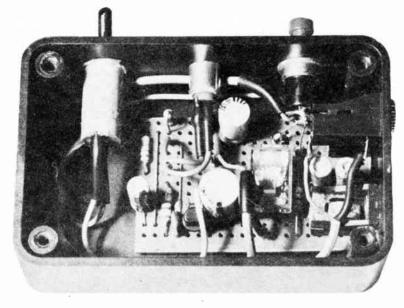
Veroboard layout and wiring for the Freeloader. The board is mounted by SK1 and SK2.
